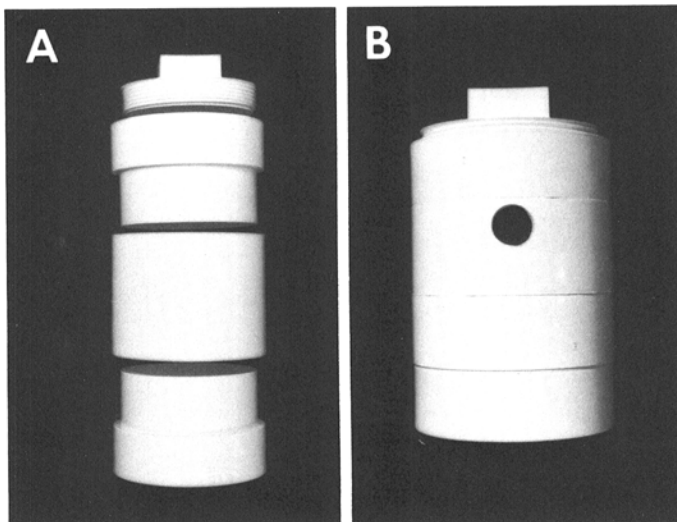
Assembly of the housing components of the PVC trap. A, The components are, from top to bottom, a threaded cap, an end clean-out, a slip coupling, and another end clean-out. B, The pieces are pressed together. A hole has been bored through the housing to retain the orifice.
